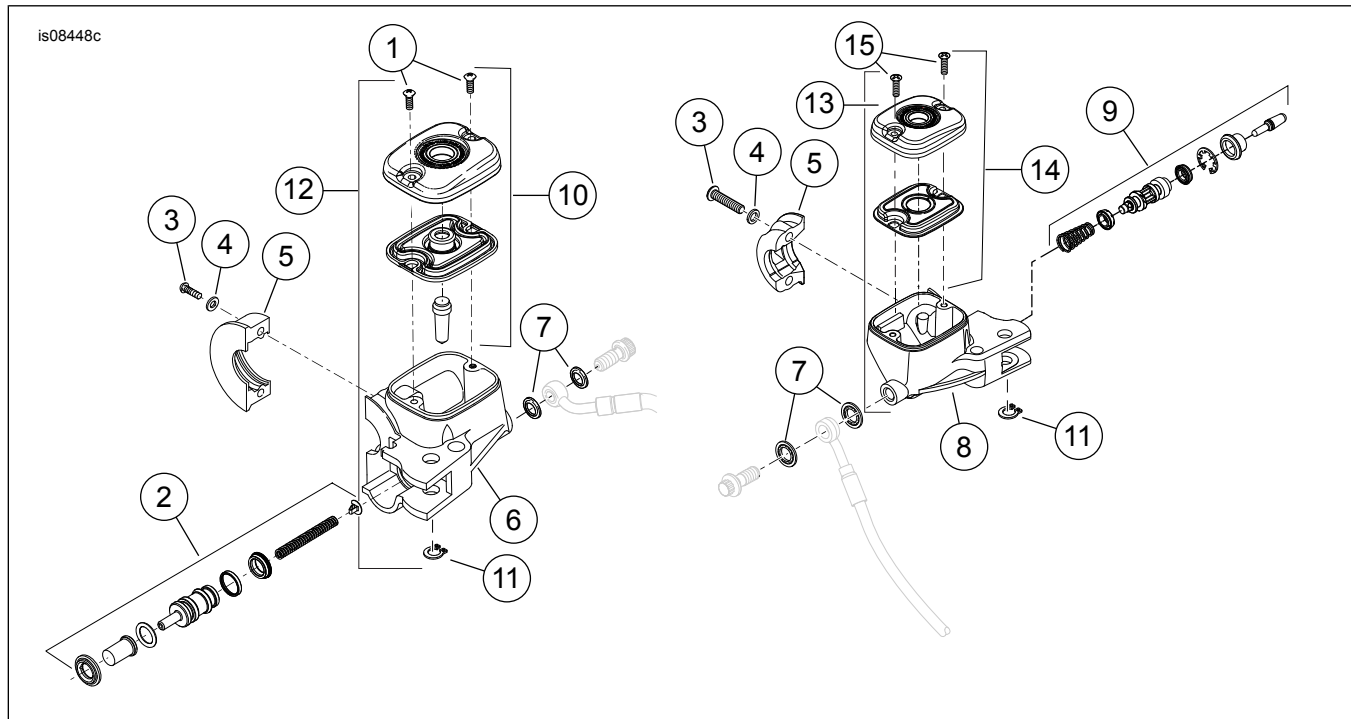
Service Parts: Chrome Clutch and Brake Master Cylinder/Reservoir Kit
